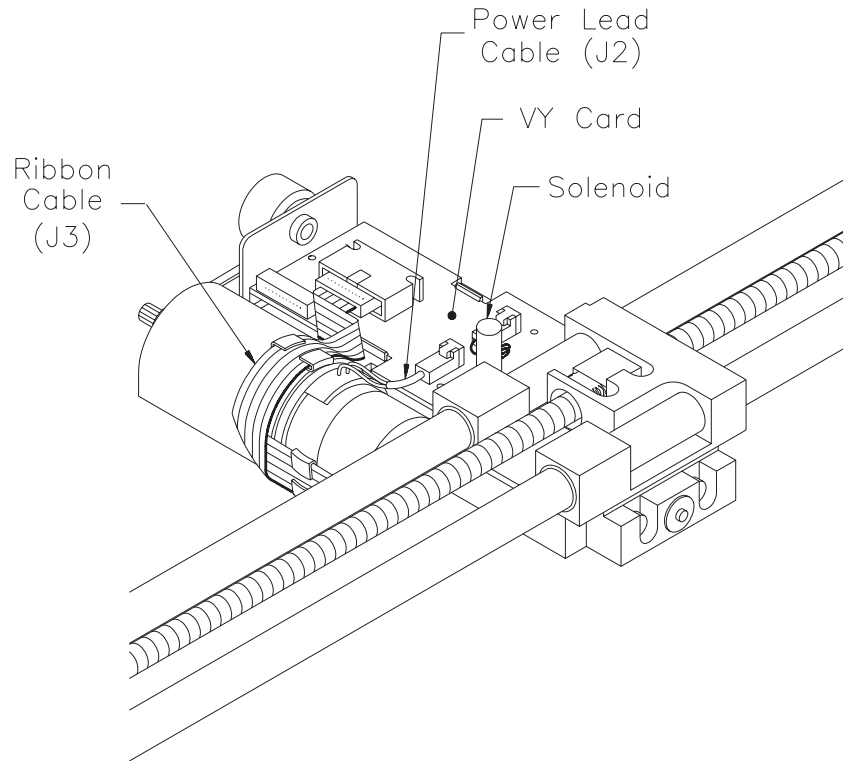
Horizontal motor and cable connections (horizontal motor still in its housing)
